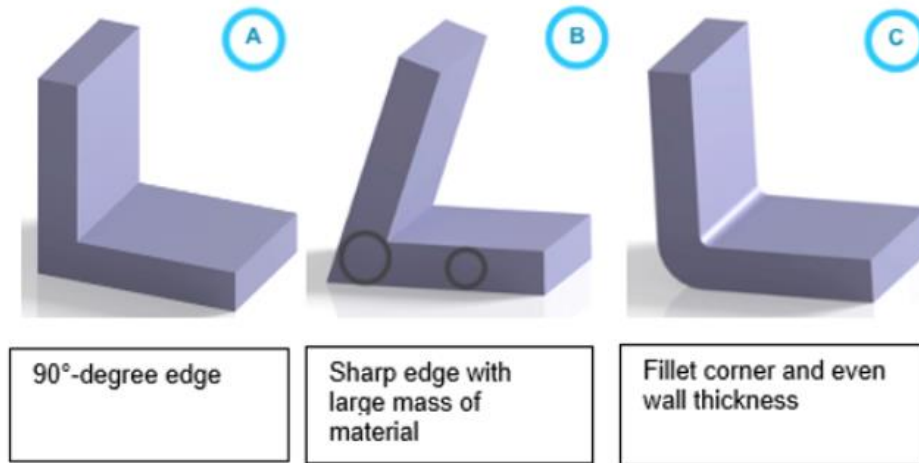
Shows situations A, B, C of typical corner cases. Andersson, L (Private).
